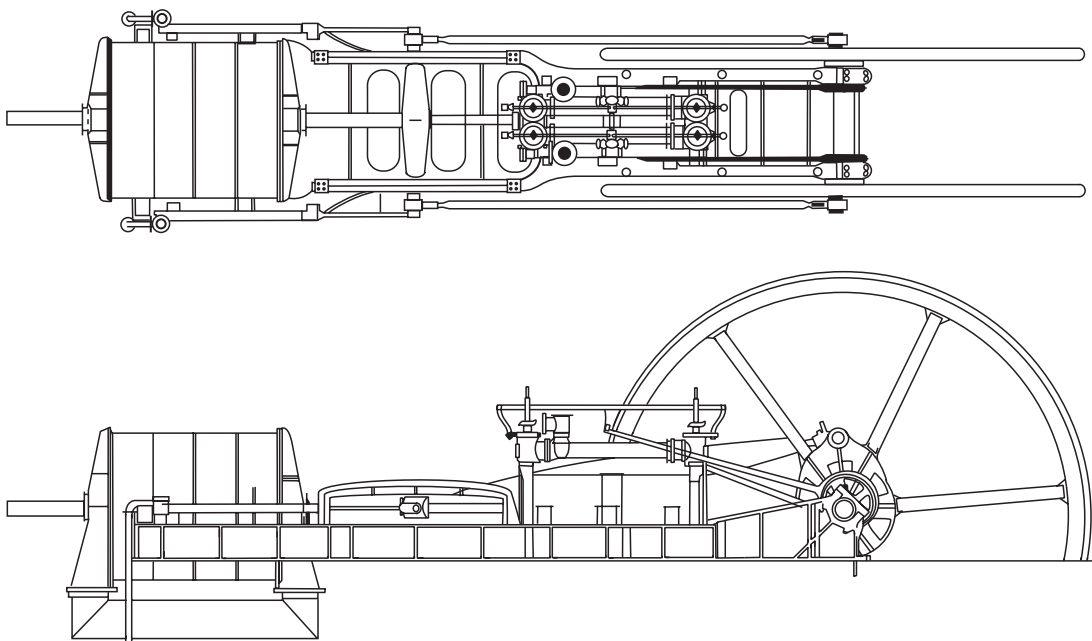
Steam-driven horizontal blowing cylinder circa 1870.
